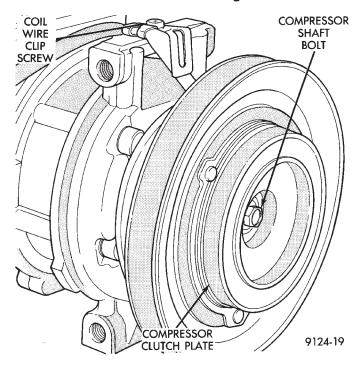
Compressor Shaft Bolt and Clutch Plate
